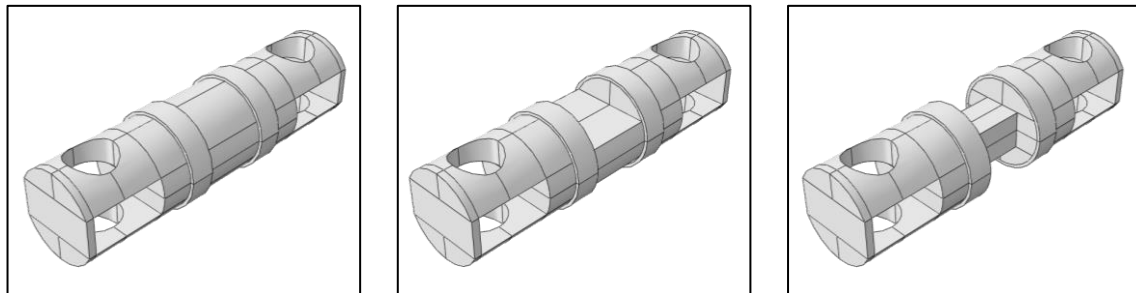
Shaft geometry: a) Current; b) Two millings; c) Four millings
